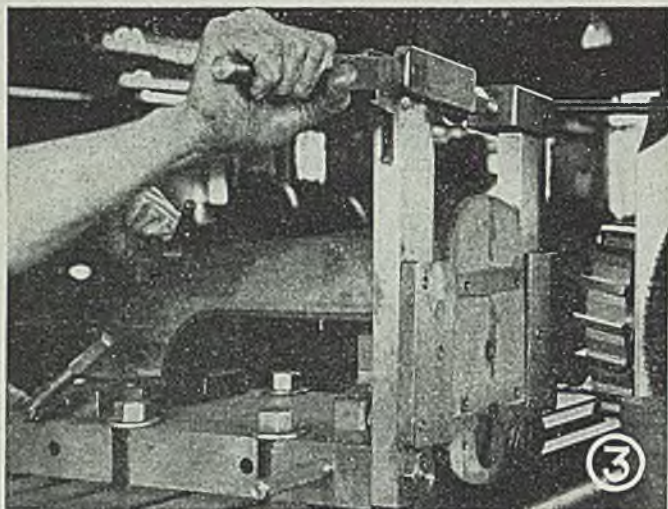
Special self-equalizing toggle clamp fixture solves “float” problem in machining castings that may have considerable variation in overall dimensions
